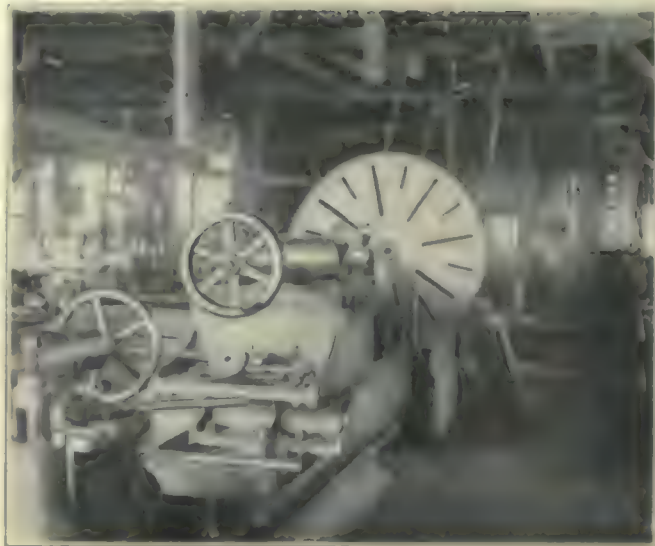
VIEW OF LATHE FROM TAILSTOCK END
